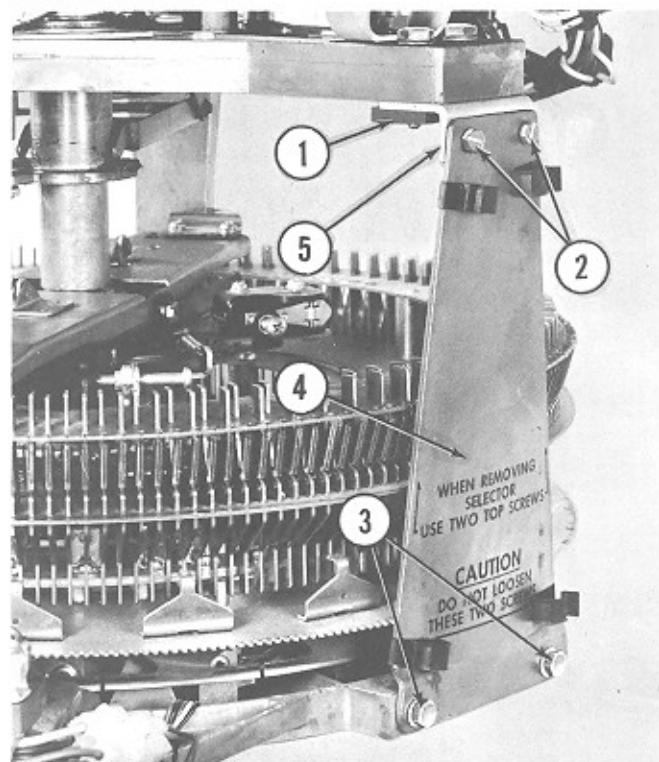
ELECTRIC SELECTOR ADJUSTMENT - 2800
